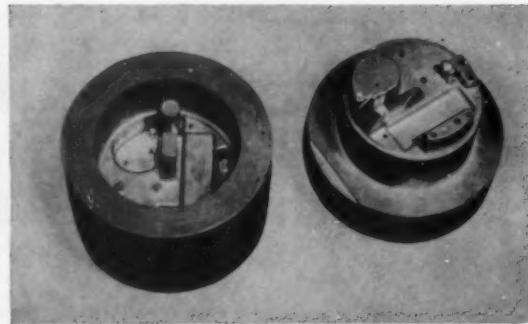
Hot-hobbed beryllium copper cavity, showing raised pins cast into the mold. Such raised pins would be difficult to raise in steel cavities.
